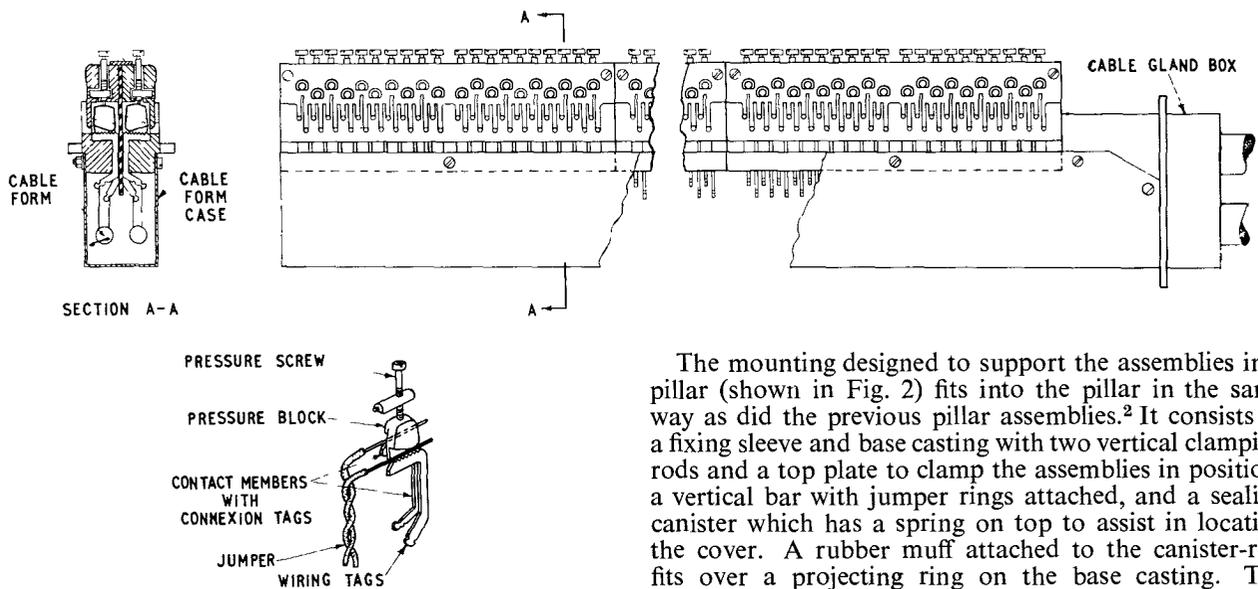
NEW CROSS-CONNEXION ASSEMBLY
